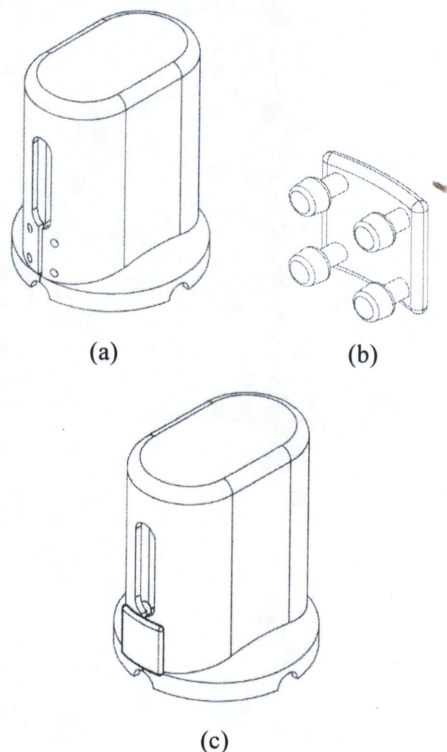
3-D model of designed bushing insulator (a) part I: main body (b) part II: strap plate (c) assembly of those insulator
